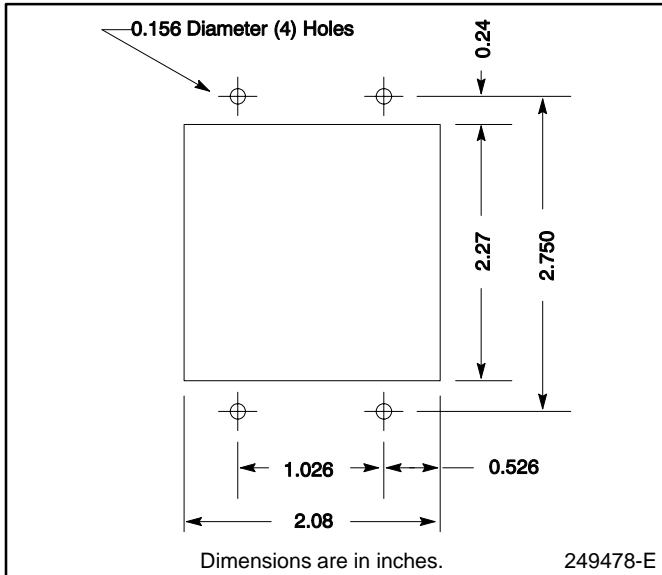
Suggested Mounting Detail for Circuit Breaker Provided in Kit PA-225638
